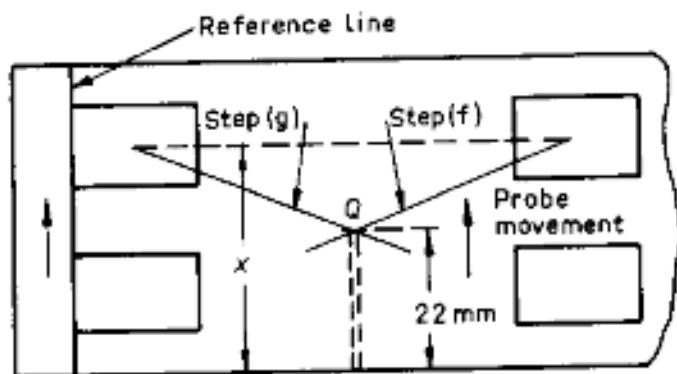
ASSESSMENT OF BEAM PROFILE, HORIZONTAL PLANE,
